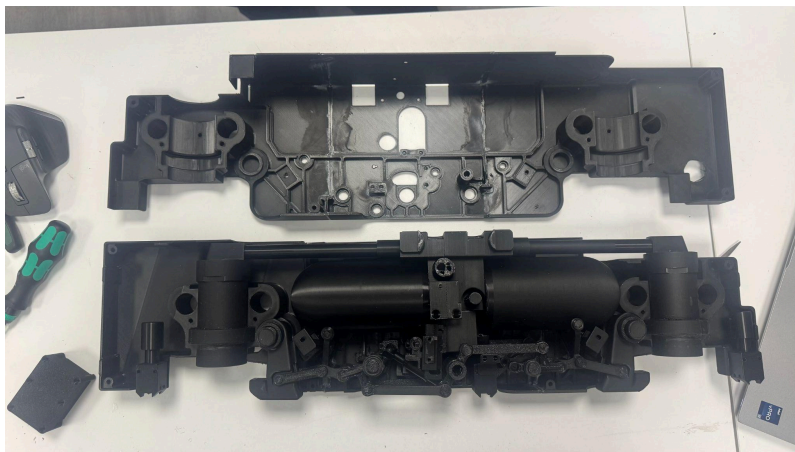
ERU (Electro-Mechanical Release Unit) 3D printed prototype for cabling
